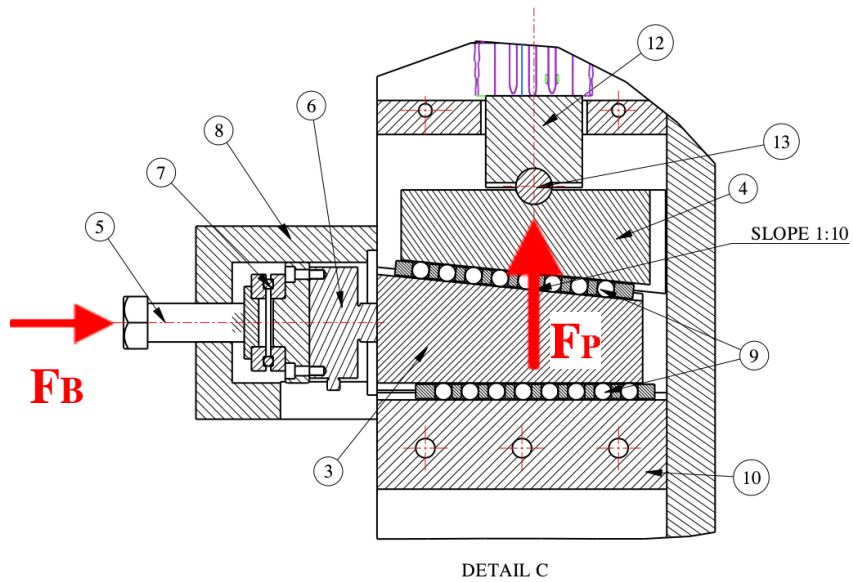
An enlarged section-view of the clamp mechanism showing arrangement of the wedge blocks and inner parts of the assembly
